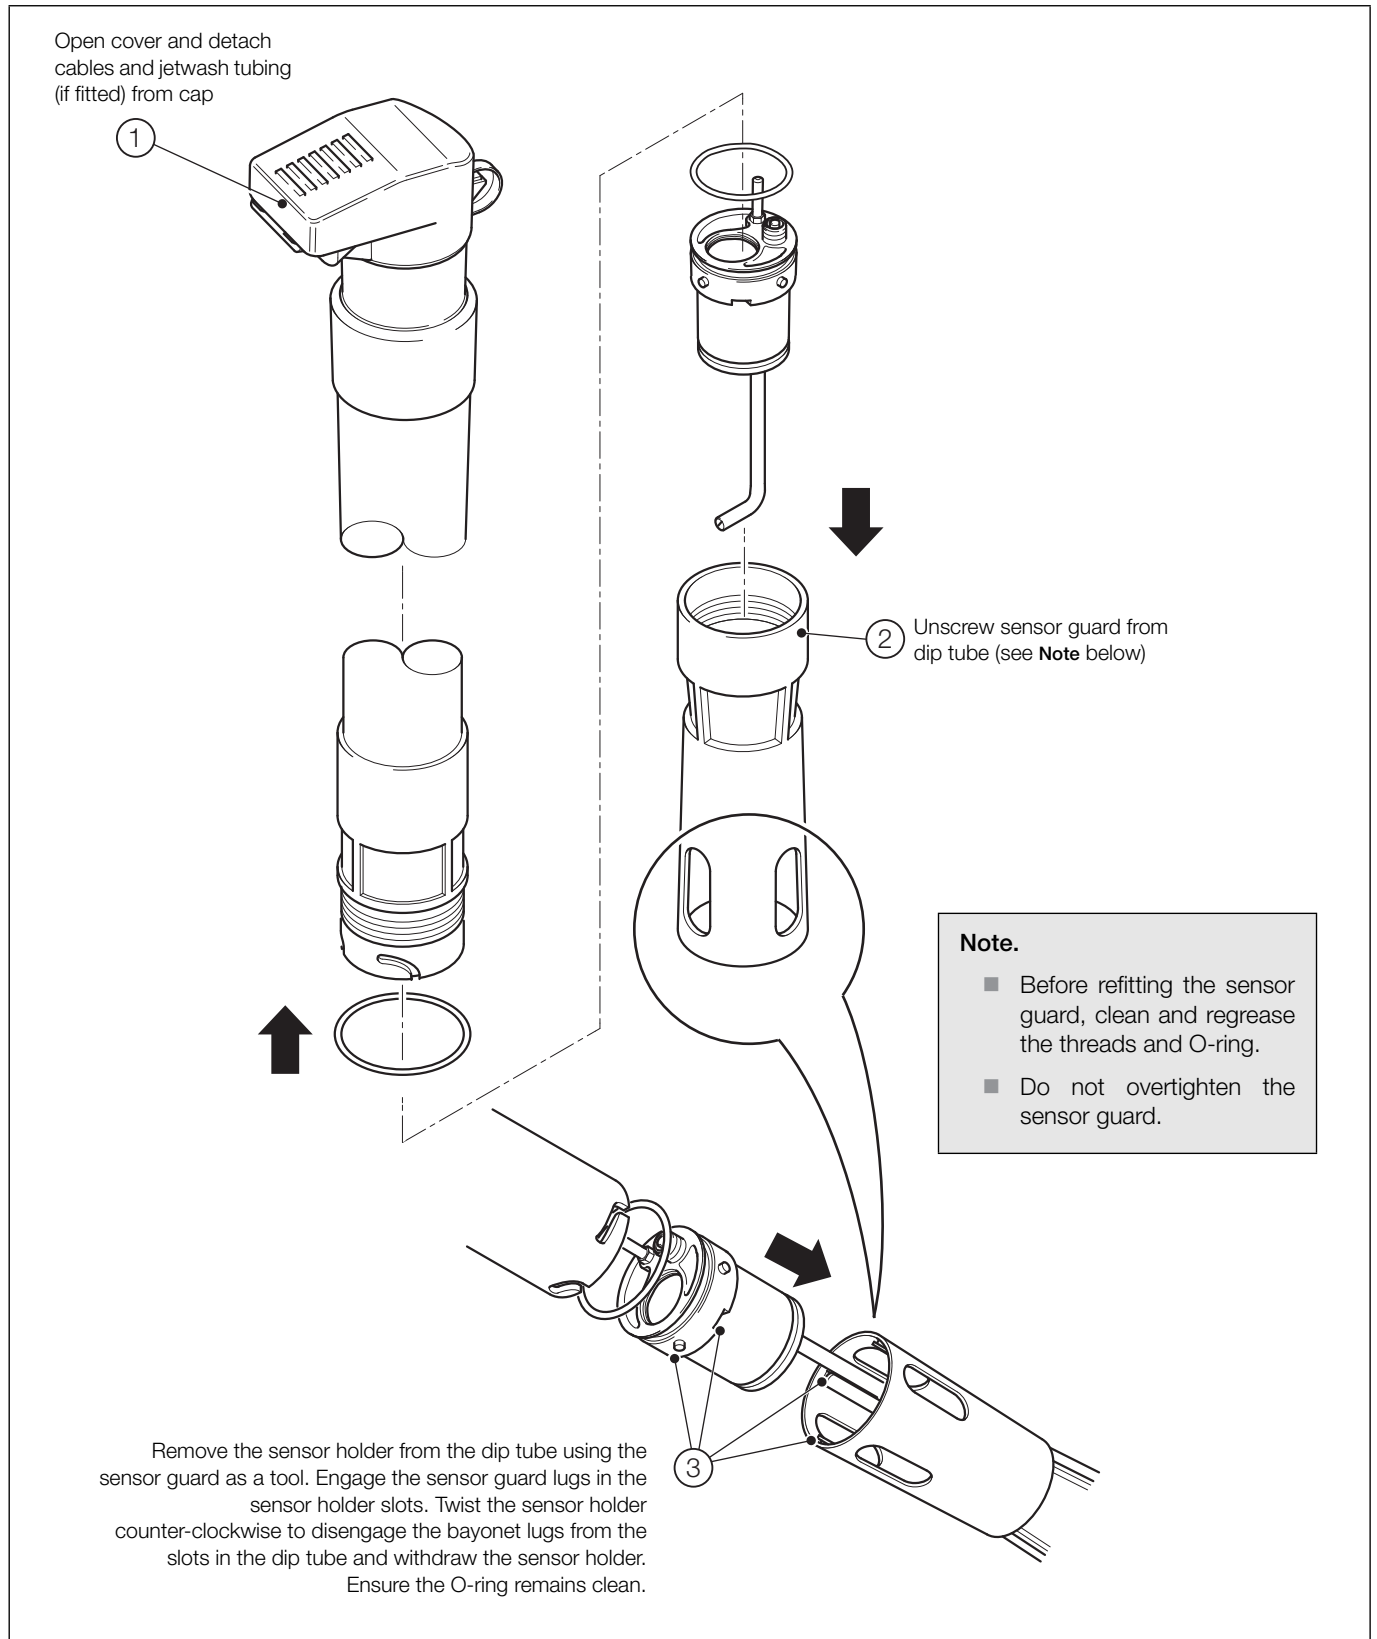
Model AP203 – Removing the Sensor Holder
